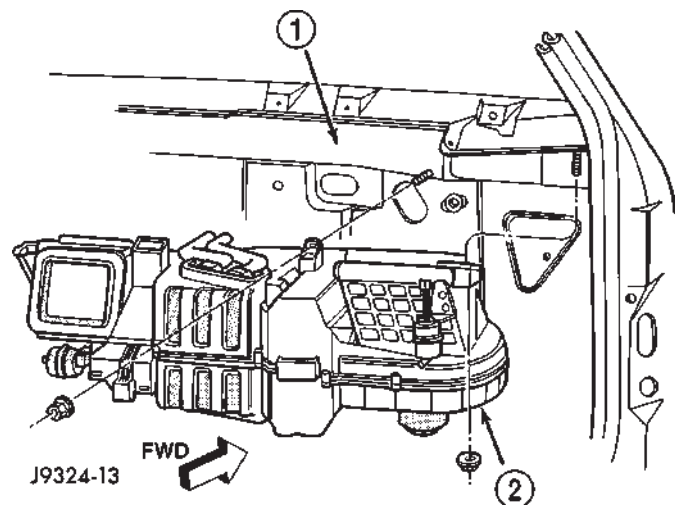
HVAC HOUSING REMOVE/INSTALL
